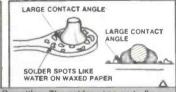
Dewetting. The solder appears to flow properly, then withdraws when the iron is removed from the joint. Reheating with more flux may effect a cure, otherwise start again and clean the joint parts.
